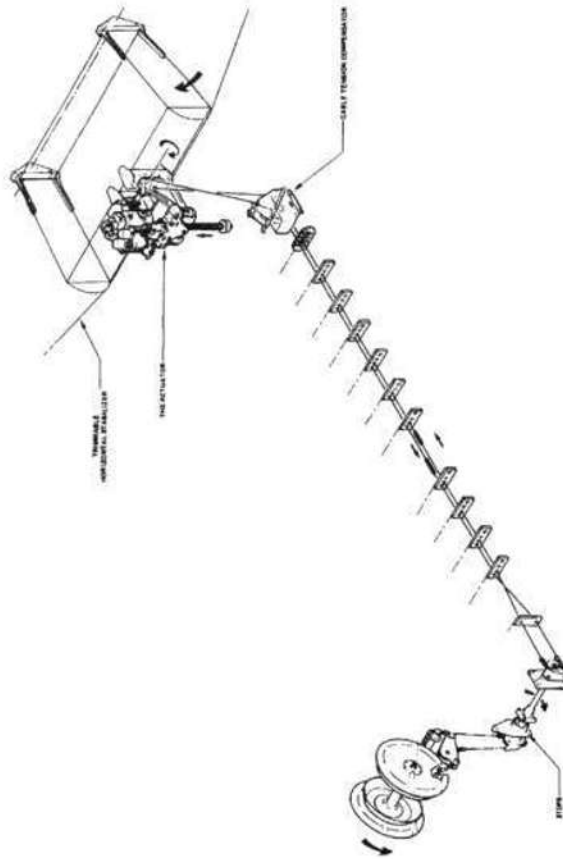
Cable run of a mechanical controlled Hydraulic Actuator
